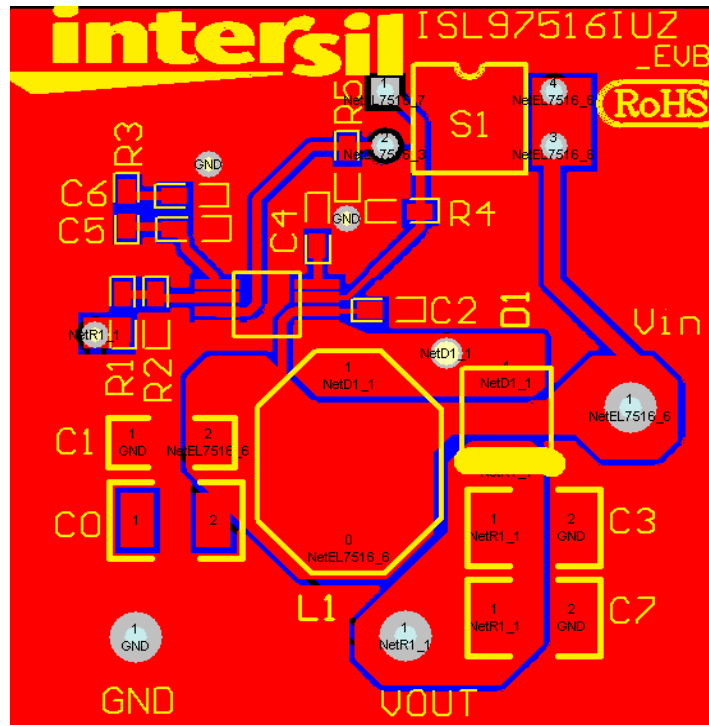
EVALUATION BOARD ASSEMBLY LAYER
